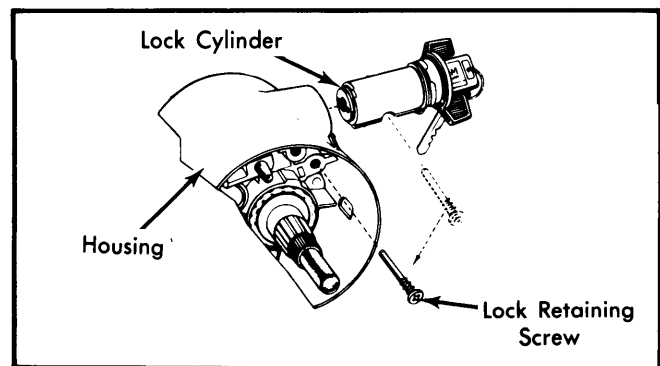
Ignition Lock Cylinder Removal (Retaining Screw Type)
